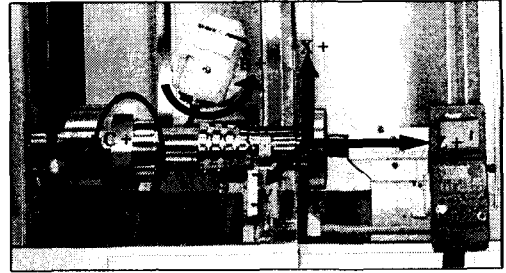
Integrex-200 Multi-Tasking Machining Center
